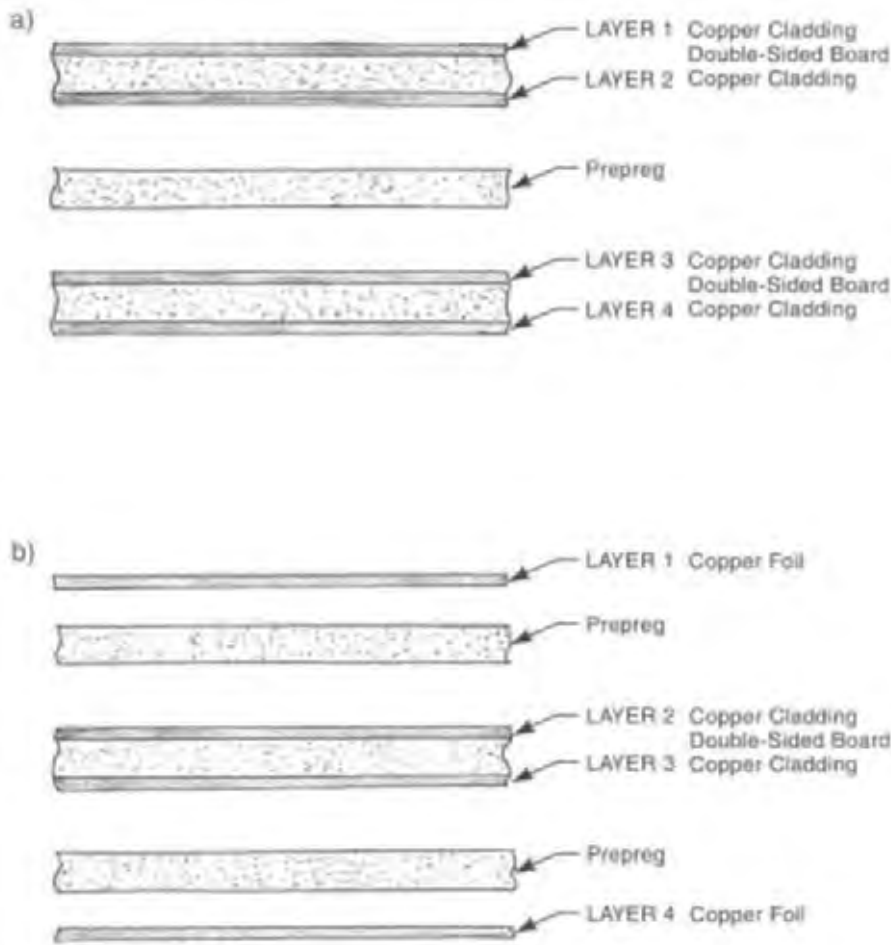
A3 Two ways to construct a four-layer, printed circuit board. With both methods, sheets of prepreg, partially cured sheets of epoxy resin reinforced with glass cloth, are used. View a) shows cap sheet lamination, using two double-sided boards (with circuit paths delineated) and one sheet of prepreg. View b) shows one double-sided board with circuit paths, two prepreg sheets and two sheets of copper foil. In both examples, the sheets are bonded together with pressure and sufficient heat to fully cure the epoxy. Multilayer boards with fewer or more layers are similarly constructed.
